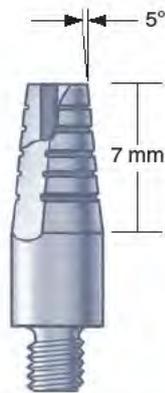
In a one-piece abutment, the screw and outer housing are one machined piece. An independent screw is required to retain a restoration in the top of this TEA.
